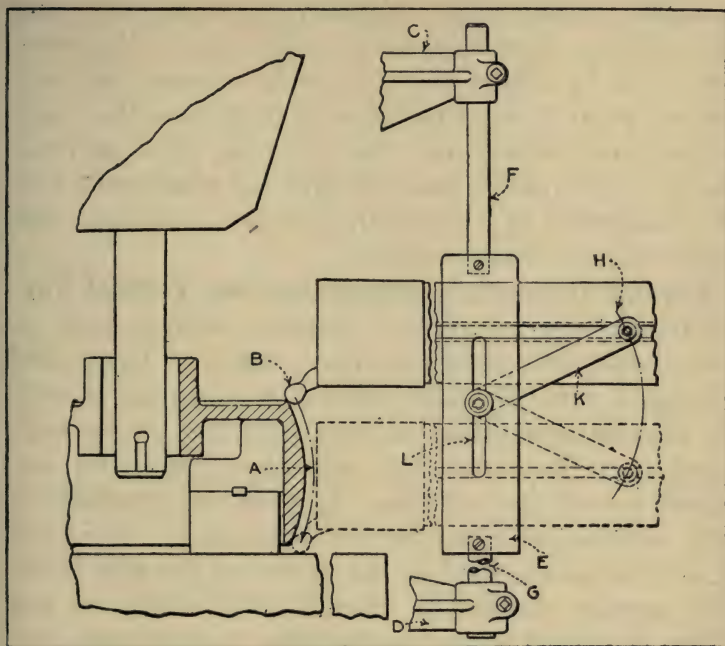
RADIUS GENERATING ATTACHMENT FOR FACING A PULLEY ON THE BULLARD VERTICAL TURRET LATHE
